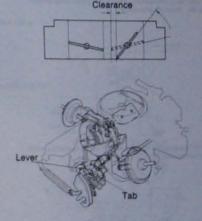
Checking the secondary throttle valve opening clearance. Aisan carburettor (Sec 12)
